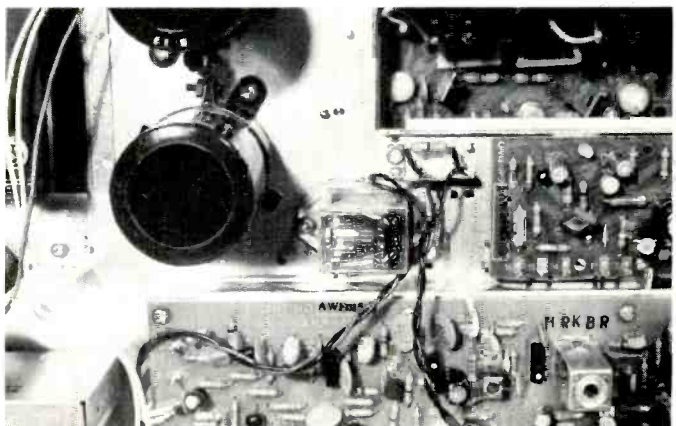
Close-up view of chassis surface which shows relay forming part of protective circuit arrangement.
